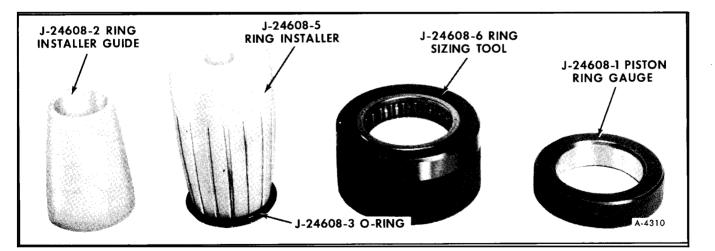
Teflon Piston Ring Installing, Sizing , and Gaging Tools
